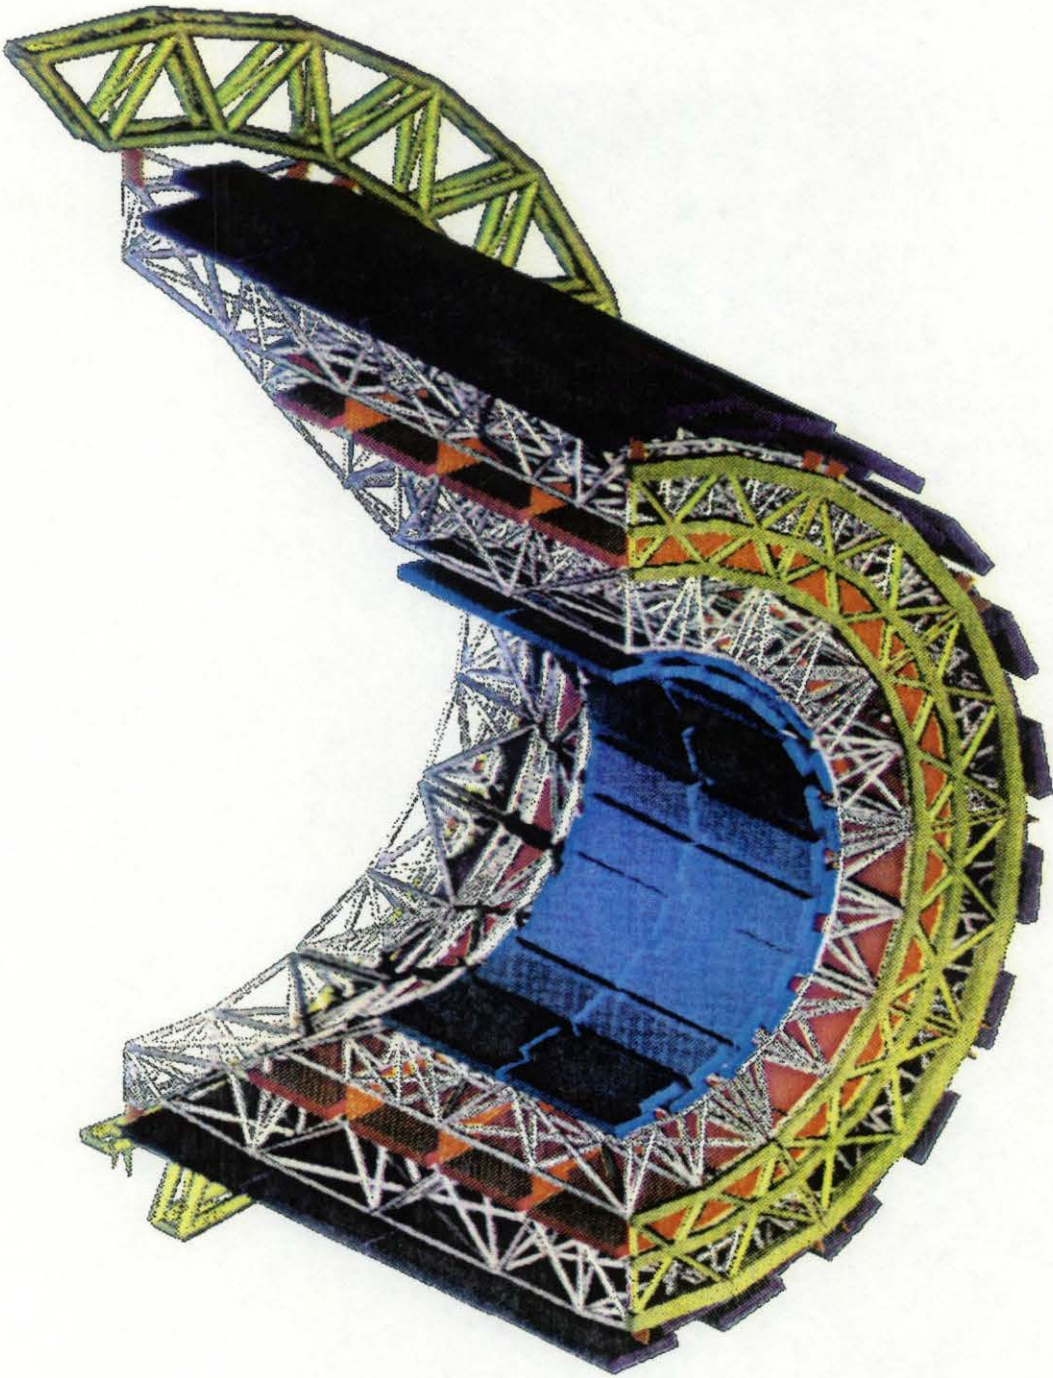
Cutaway model of barrel monolith showing the truss structure and support ring ends.
